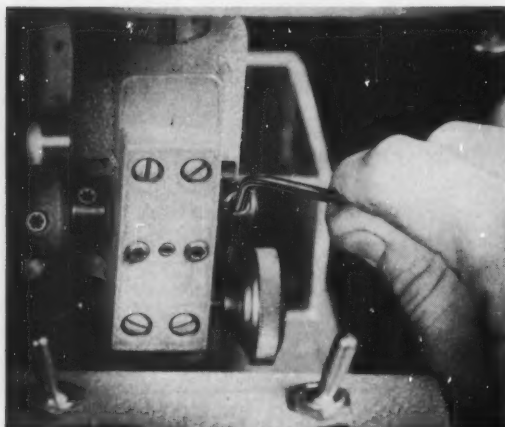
Tightening recessed socket screws having fluted sockets. Alloy steel fluted keys permit application of maximum torque.
